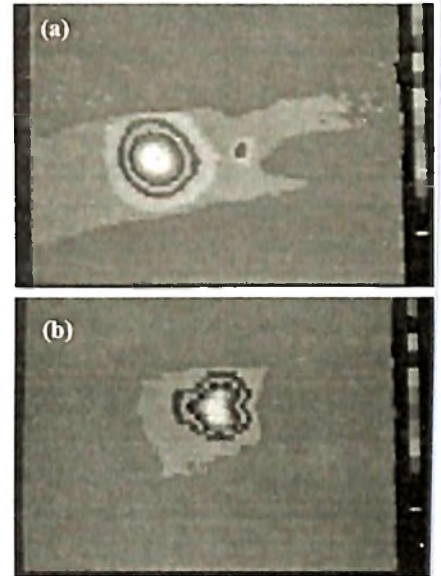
Thermogram of (a) good weld, and (b) bad weld
